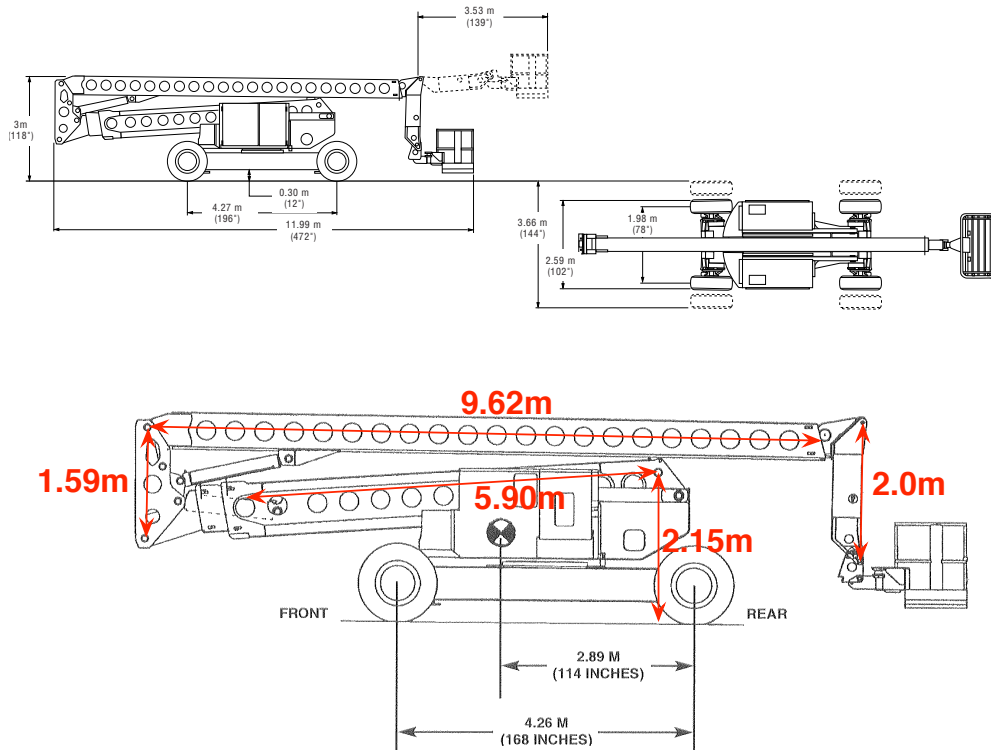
Machine Dimensions (Red Indicates Calculated Lengths)
